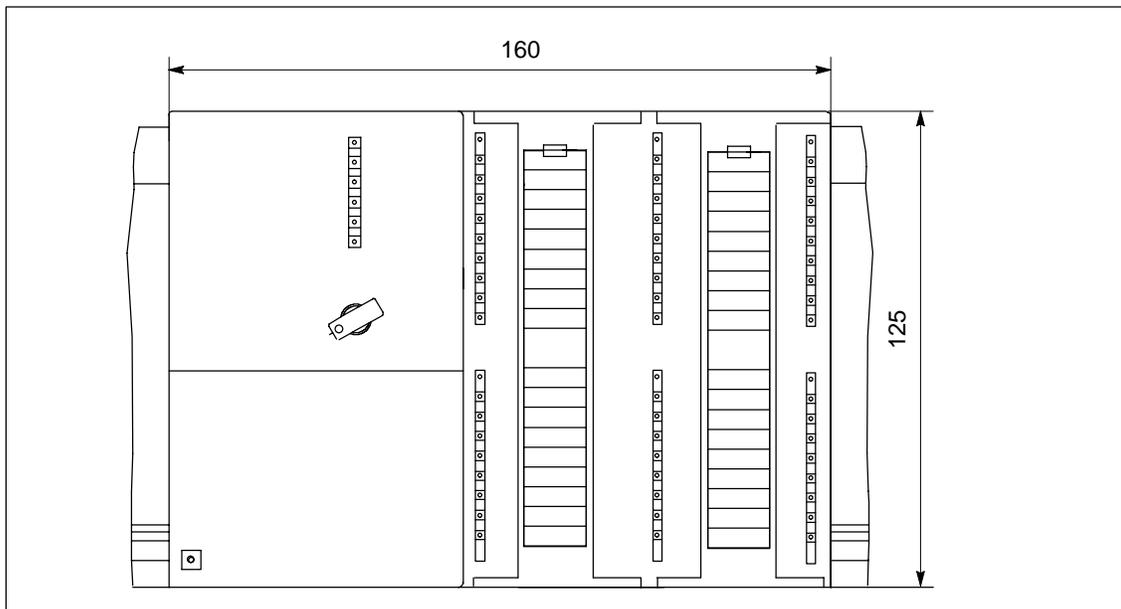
Dimensioned Drawing of the CPU 314 IFM, Front View
